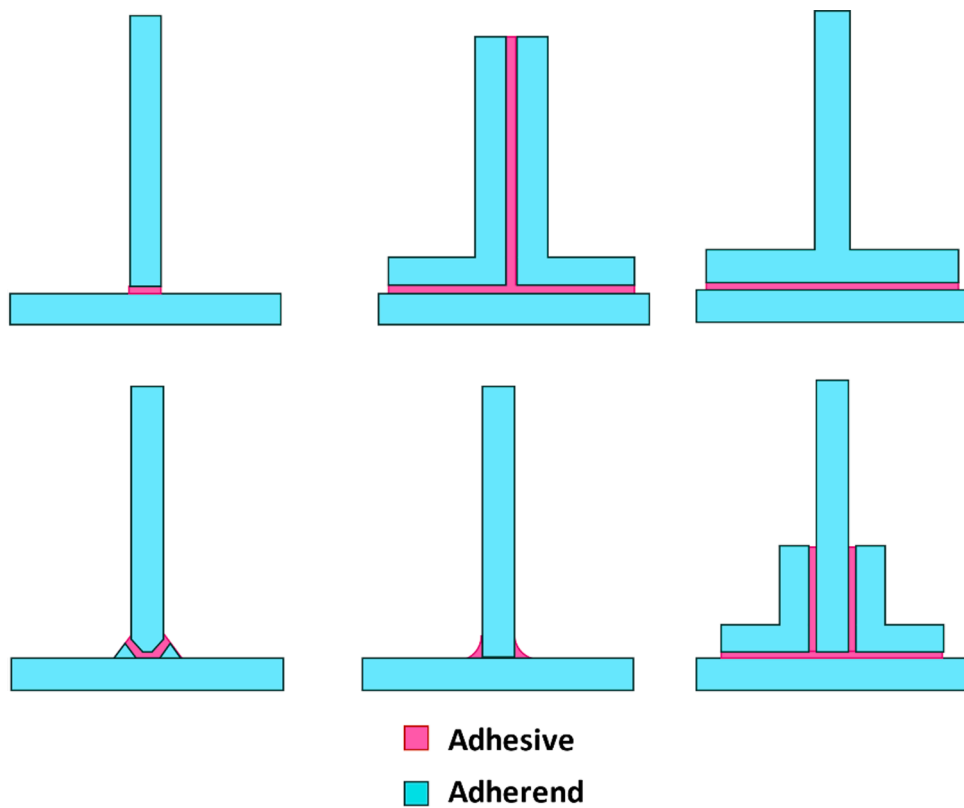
Typical types of marines adhesively bonded T-joint configurations with sandwich structure substrates (adapted from [58-64]).
